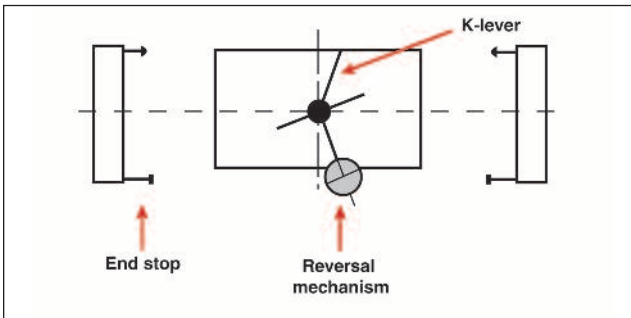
Screws called K-stops are positioned to contact the K-lever in such a way that the rolling ring assembly is partially pivoted just before the reversal point, thereby reducing linear speed of the drive before reversal takes place. This cushions the intensity of the reversal motion.
